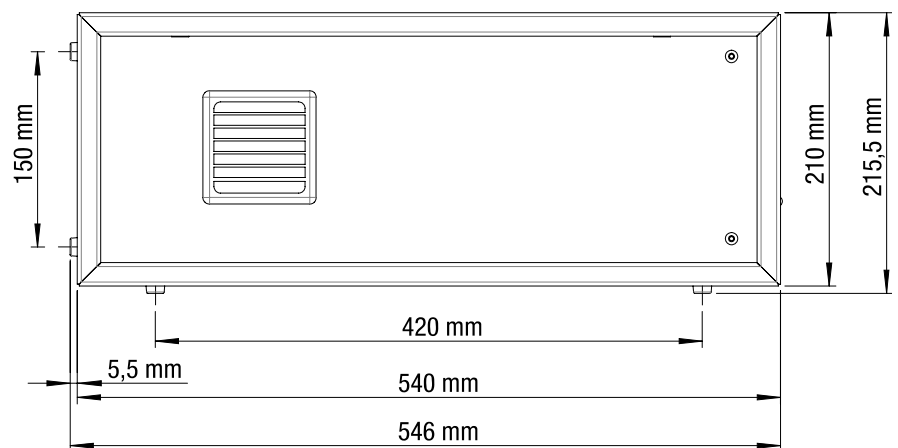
Side view – G-FRAME 54 control unit (exemplary)
